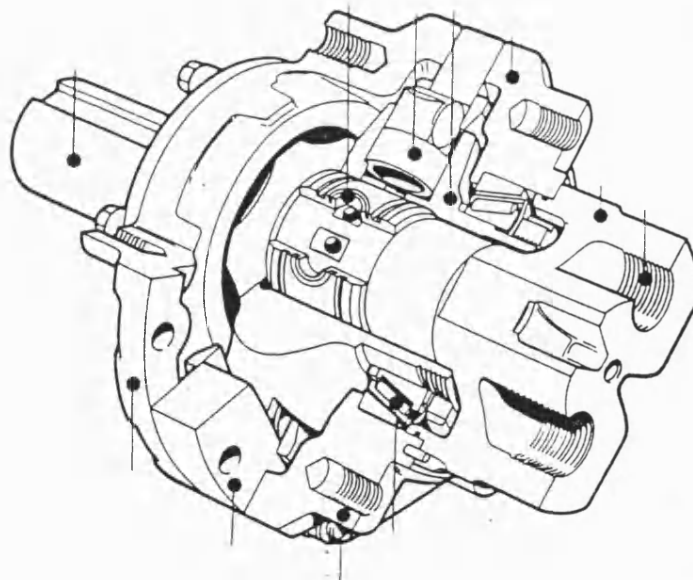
RENOLD RADIAL PISTON CAM MOTOR
